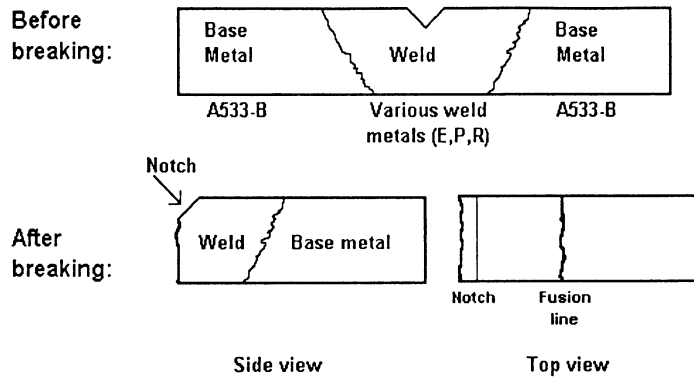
Orientation of the weld in the Charpy specimen.
